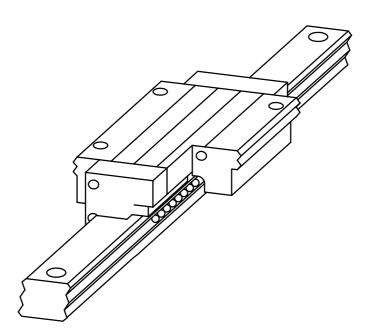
Recirculating linear ball [roller] bearing, linear guideway type
